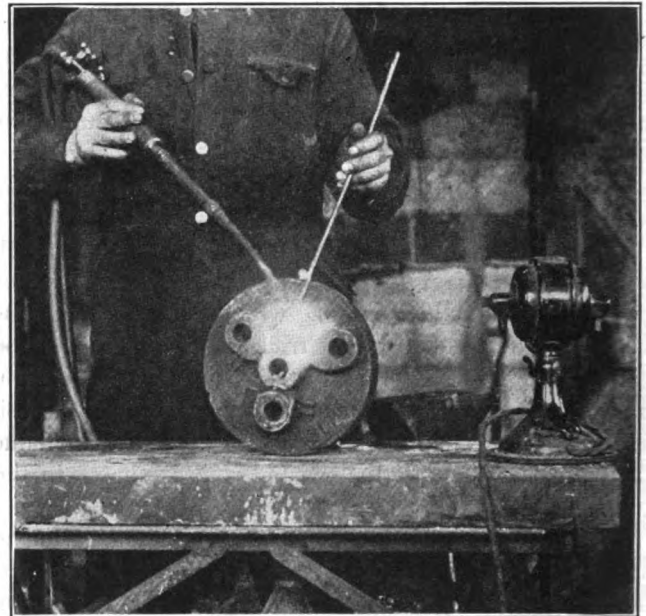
, An electric fan of the common house variety blows away the fumes of a welded casting.
